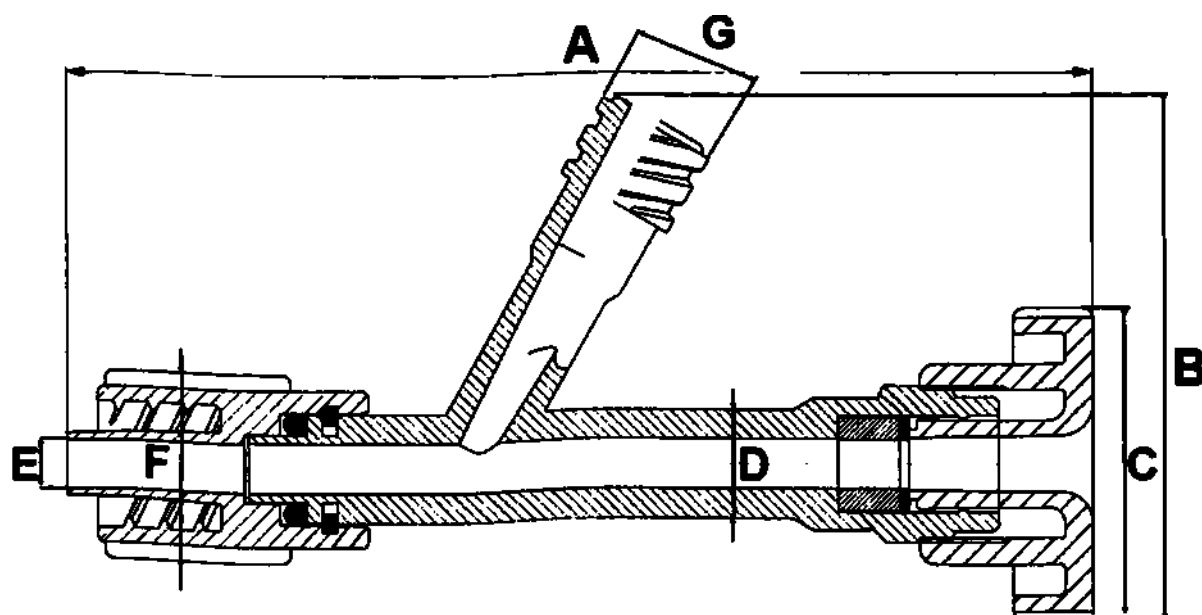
Dimensions of ANRYV Sterile Disposable Y-Shaped Connector with Two Adapters
